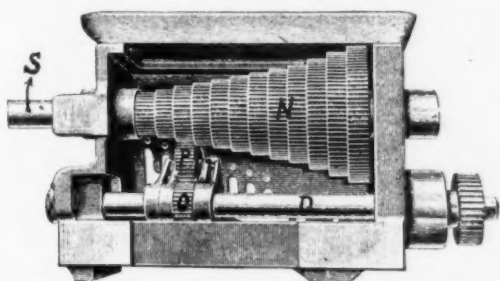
REAR VIEW OF GEAR-BOX, SHOWING GEARING.
